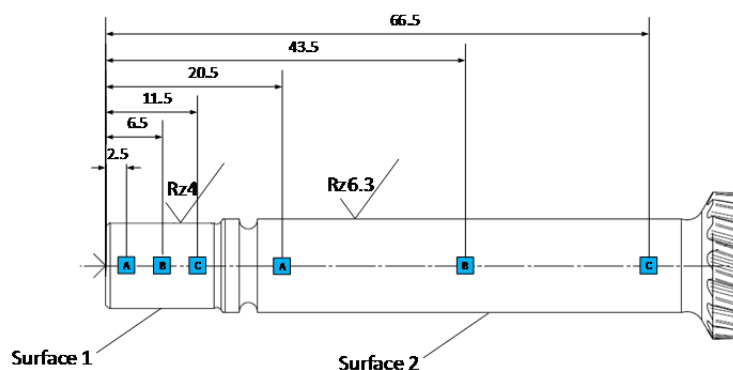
Surface roughness measurement positions on the rod parts of the tested planetary axle
